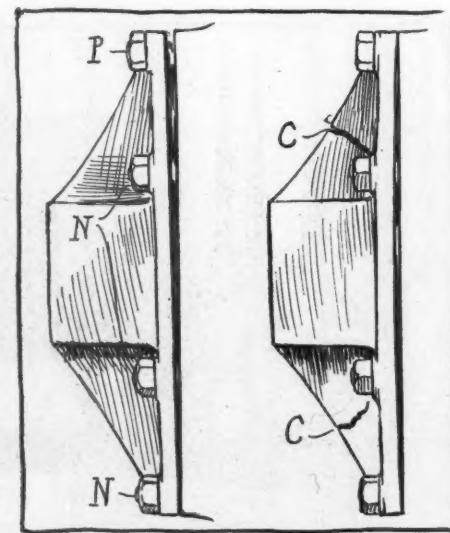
CRANKCASE CRACKED BY IMPROPER TIGHTENING OF BOLTS
